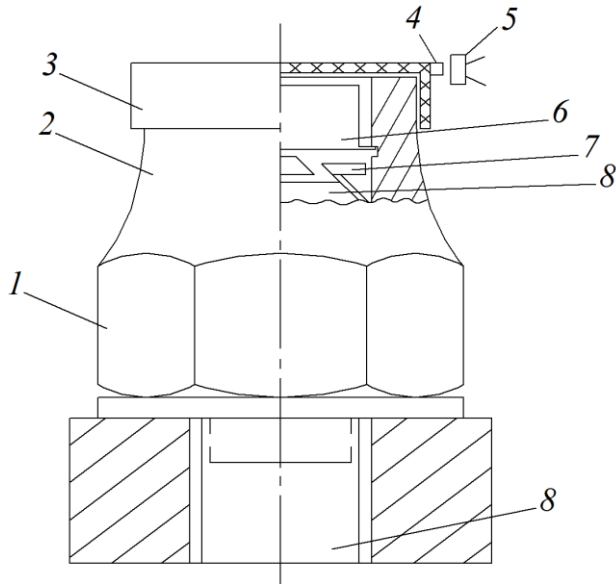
Nut-indicator for overheating of sectional casing of technological machine in assembled state
